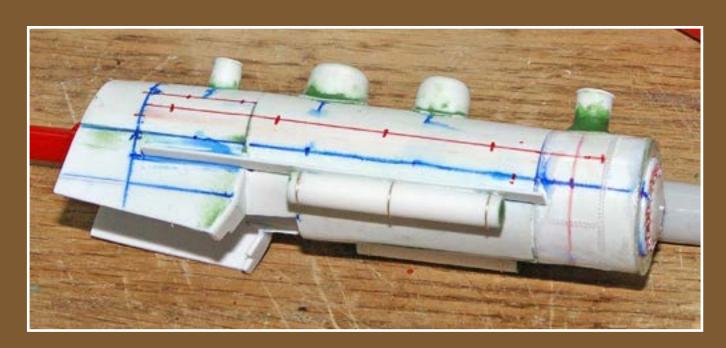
I marked out the locations for the handrails and cleanout plugs using a contrasting color marker (red), so they would show up among all the other marks.
